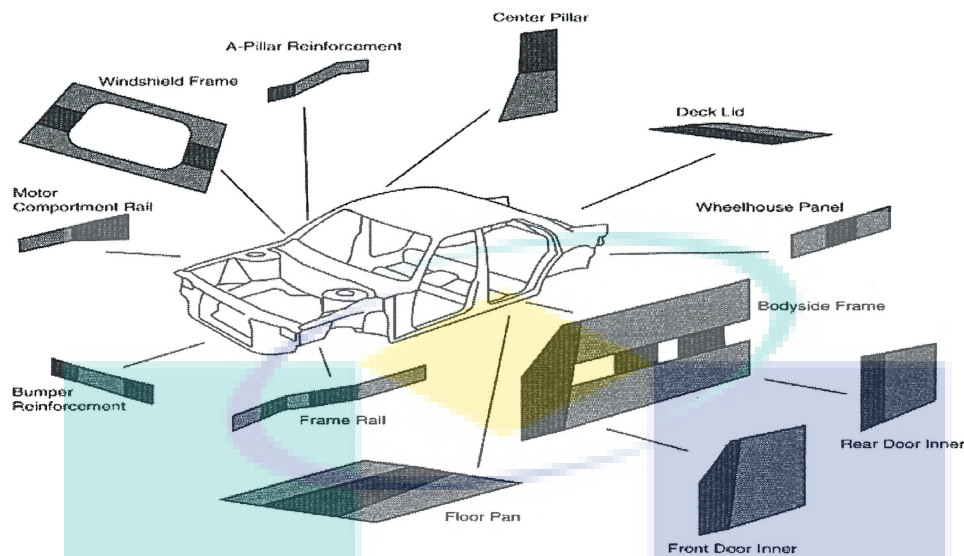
Exploded view of current and potential automotive tailor welded blank applications [1]
